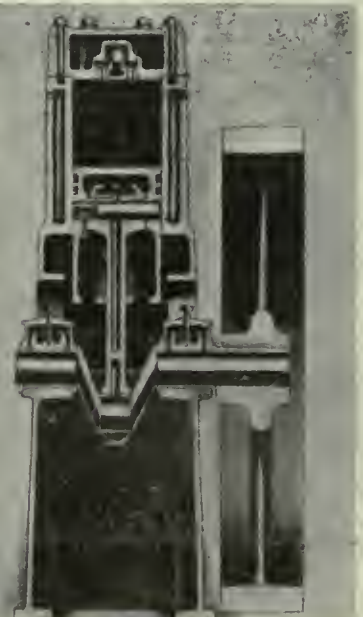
CURTIS SINGLE CYLINDER AIR COMPRESSOR.
